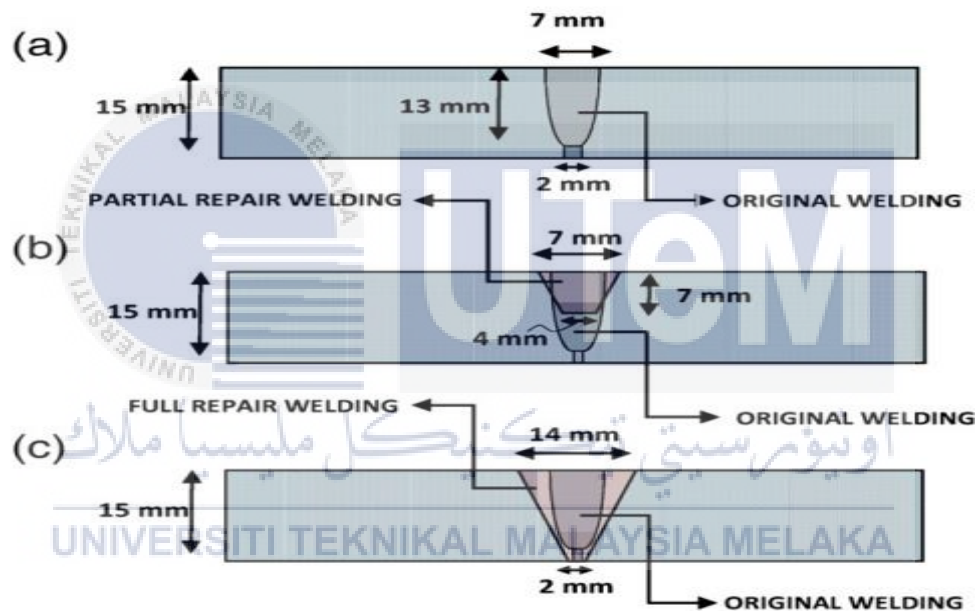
Weld passes of profile for (a) original welding, (b) partial repair weld and (c) full repair welding (Zeinoddini et al., 2013)
